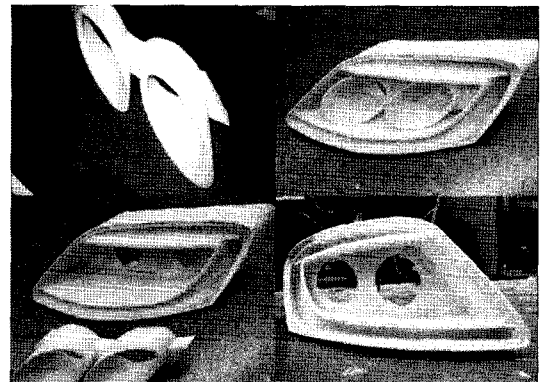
Manufacturing Head Lamp Frame and Inner Cylinder Prototype by RP
